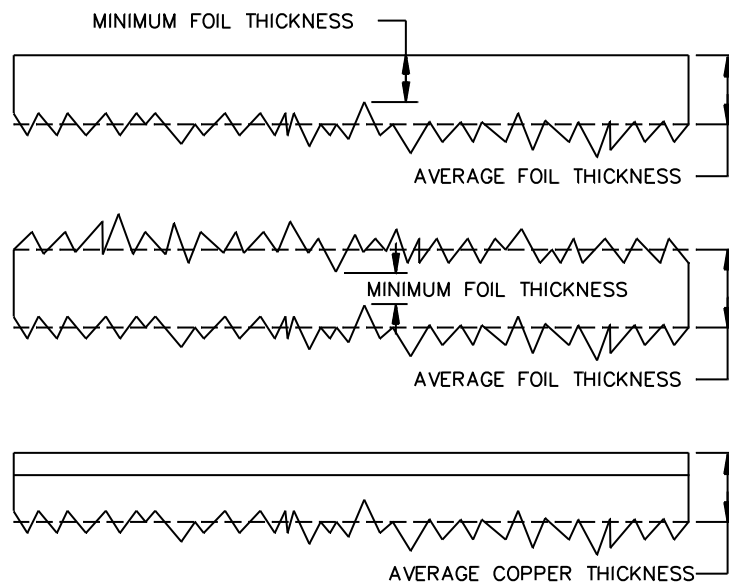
Copper foil and copper foil with plating thickness measurement.
